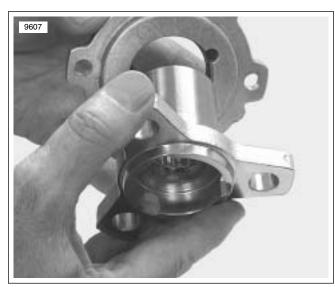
Seal Retainer and Drive Sprocket Flange
